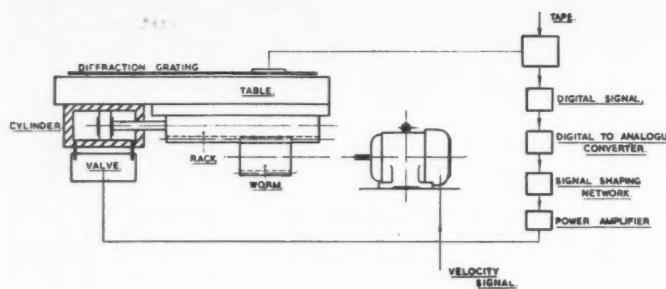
Feed drive combining long stroke worm and rack arrangement and short stroke hydraulic piston for precision positioning.
